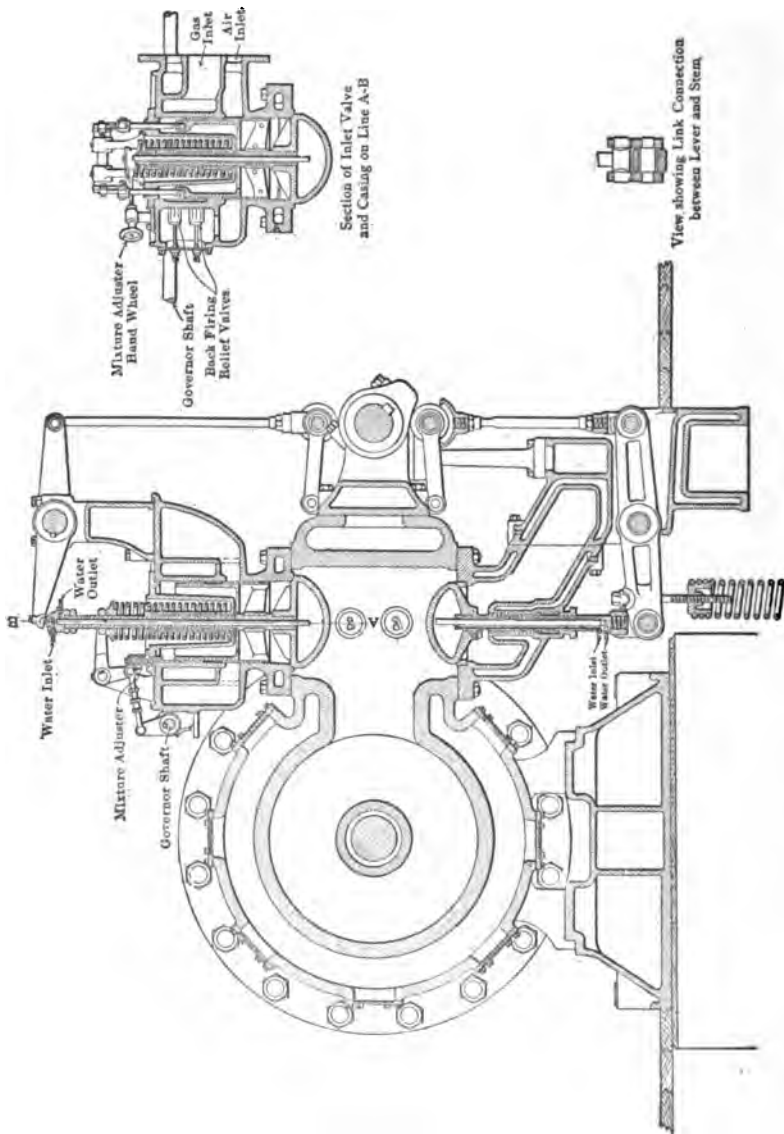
Transverse Section, Snow Type A Engine.
